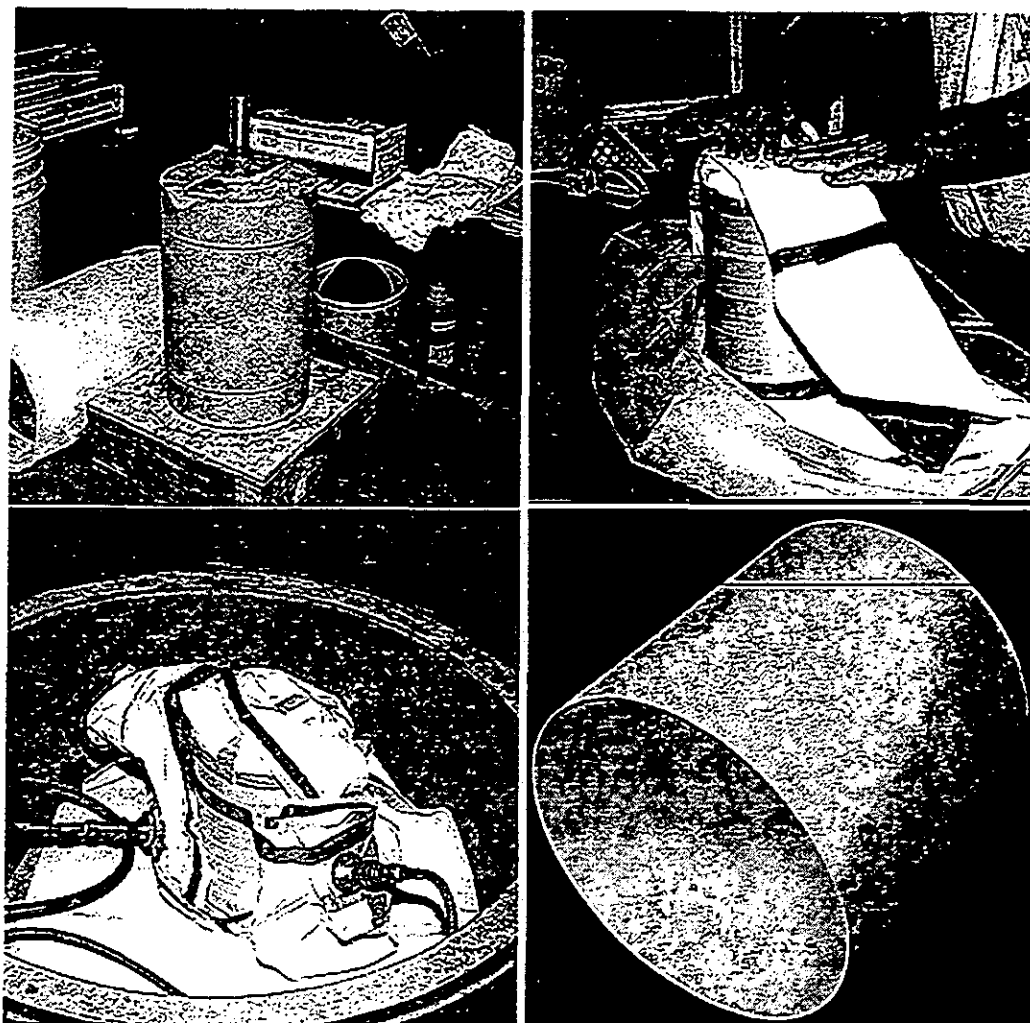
The Tooling (Top-Left), Ply Lay-Up (Top-Right), Bagging Process (Bottom Left) And Finished Part (Bottom Right)
